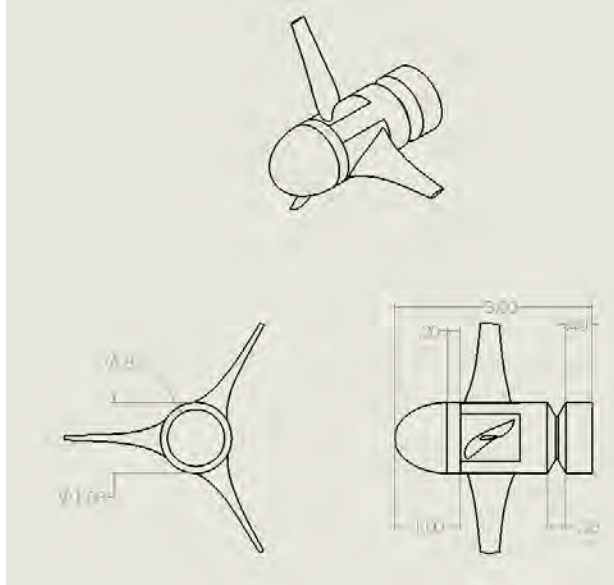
Technical Drawing for in-stream axis turbine. Diameter of 4 inches, NACA 4421 foil
